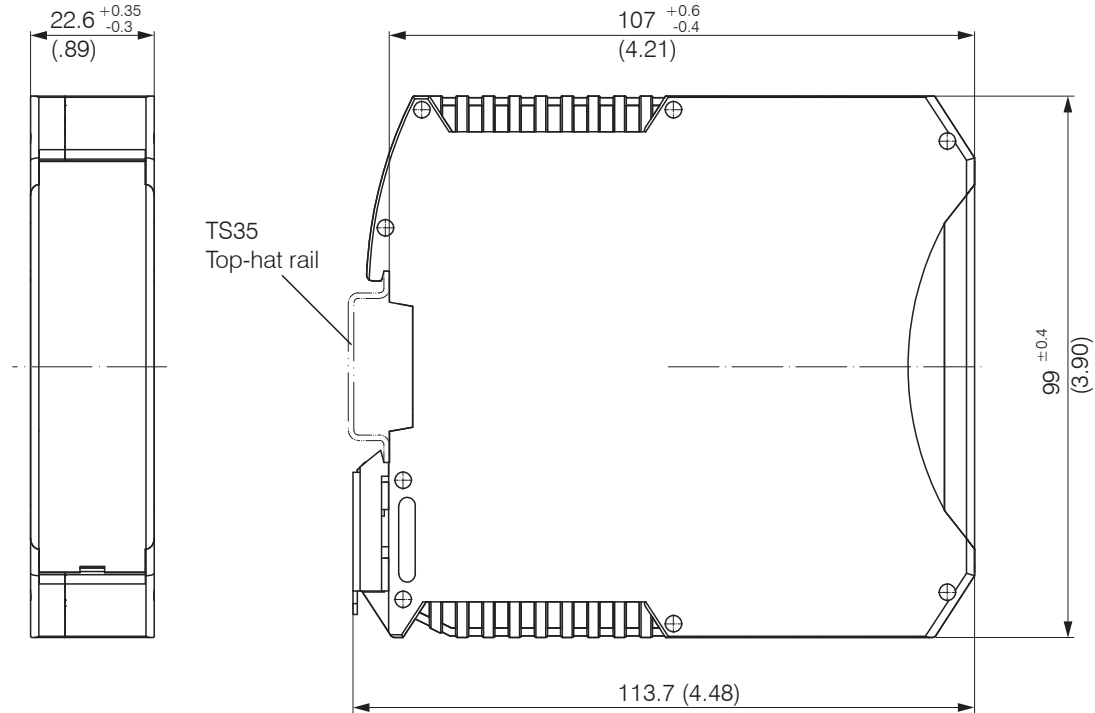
IF2035-PROFINET dimensional drawing, dimensions in mm (inches)
